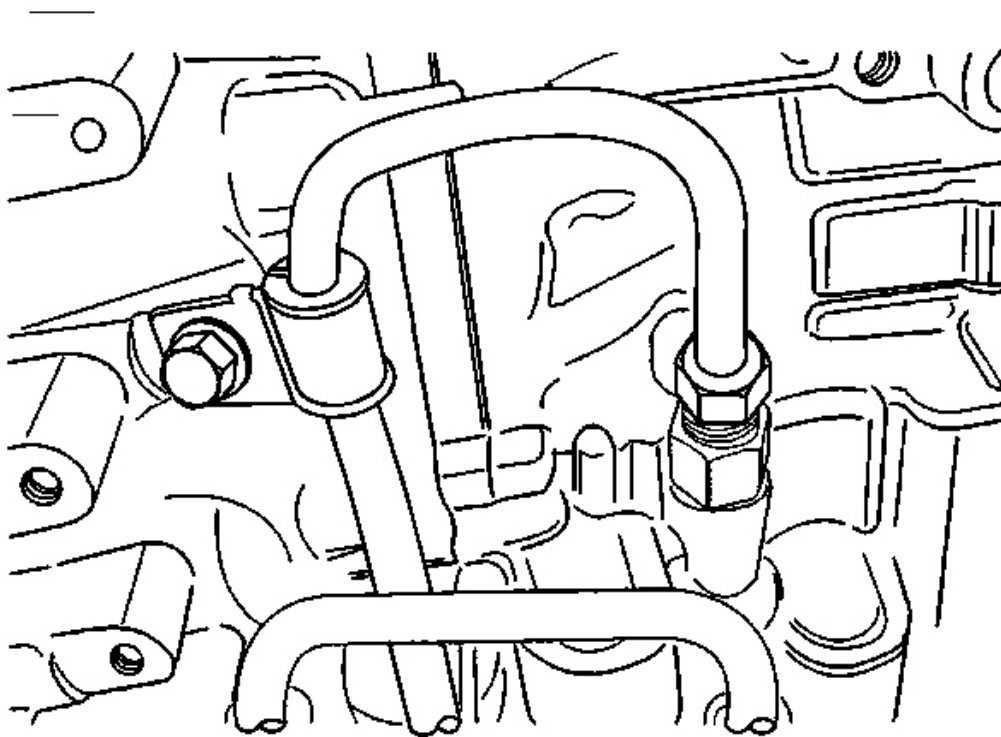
Installing Fluid Cooler Inlet Pipe, Bolt & Transaxle
